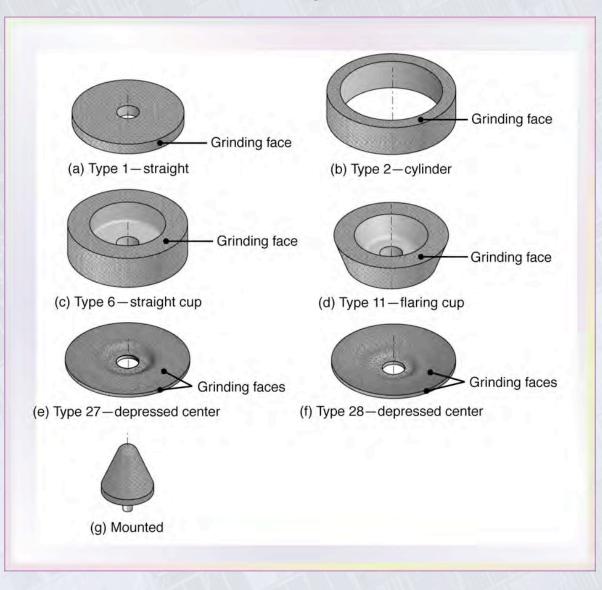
Common types of grinding wheels made with conventional abrasives. Note that each wheel has a specific grinding face; grinding on other surfaces is improper and unsafe.
